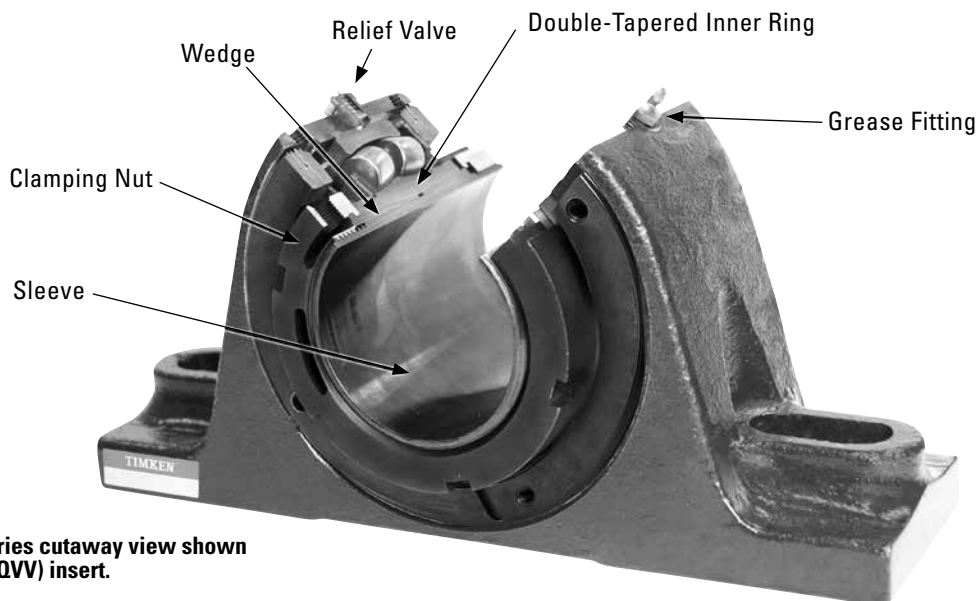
V-Lock series cutaway view shown with double-nut (QVV) insert.
